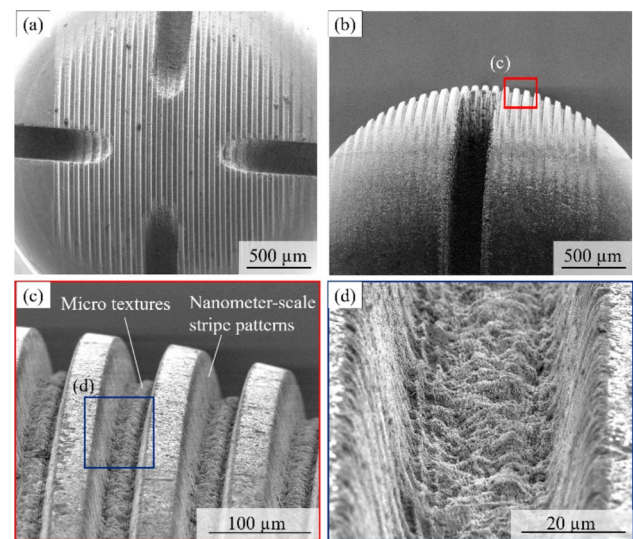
SEM images of the tool surface after laser irradiation: a top view; b side view; c enlarged view of grooves; d enlarged view of the inside of a single groove
